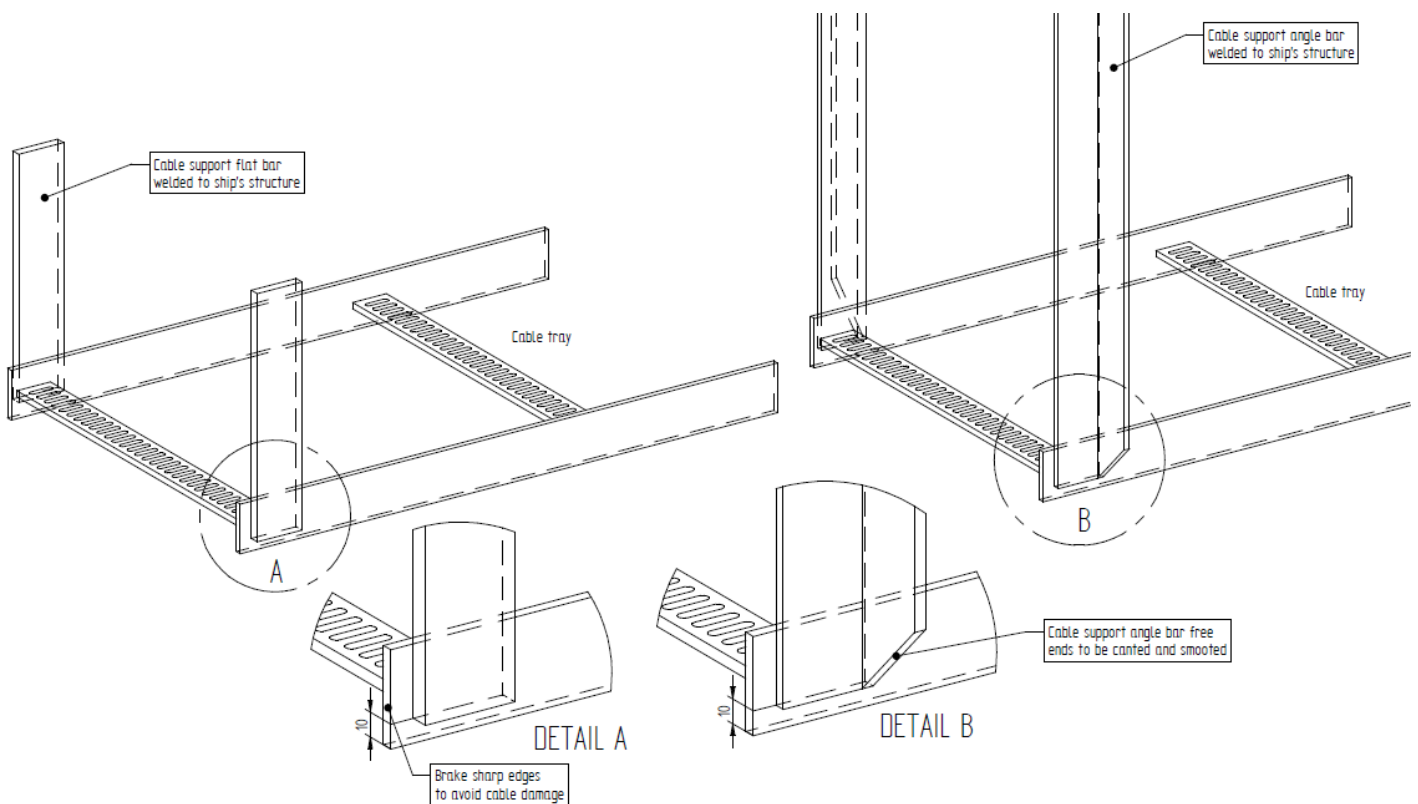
Typical details for cabletray flatbar and canted, smoothed anglebar supports
